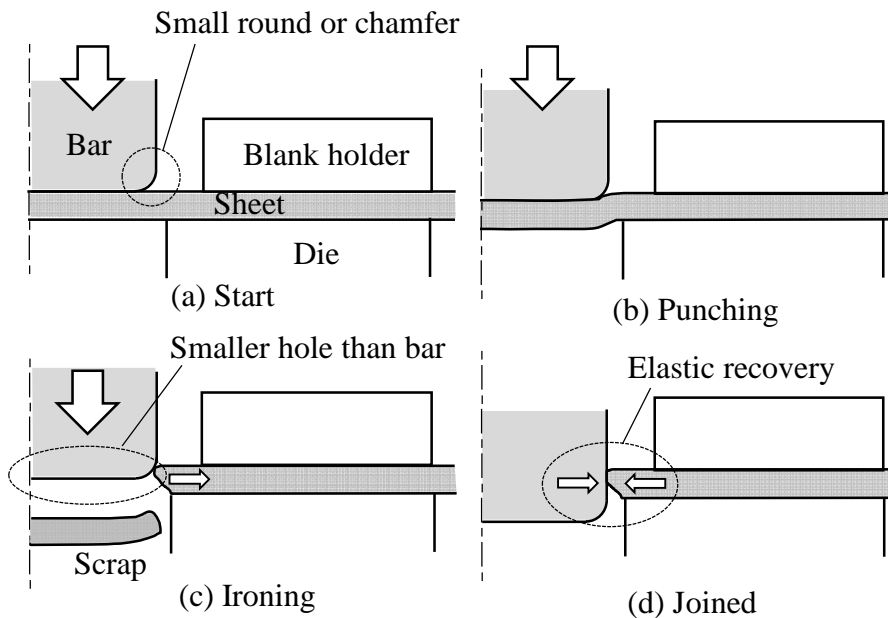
Joining of bar to hot-stamped steel sheet by punching.
